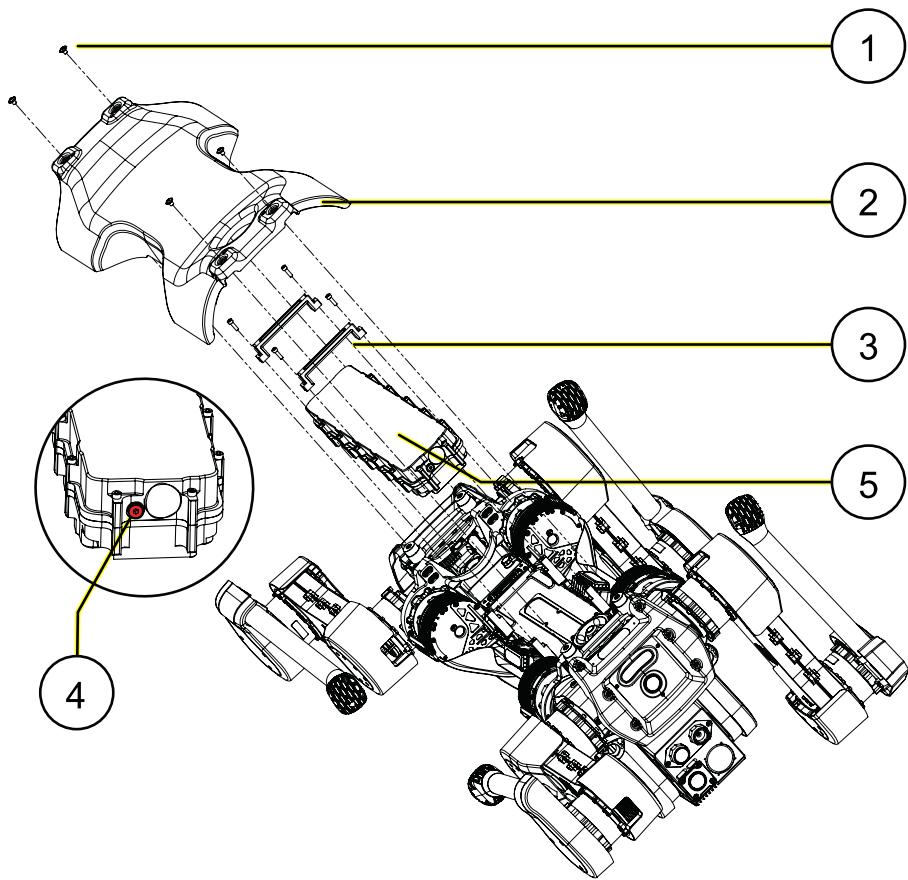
Underside of Robot showing bottom shell and battery assembly
